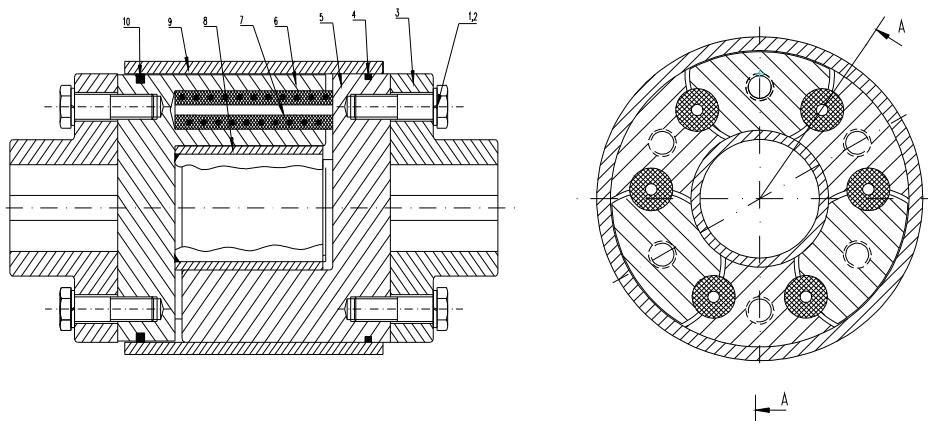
SERB-CAR-01 type coupling – longitudinal cross section
